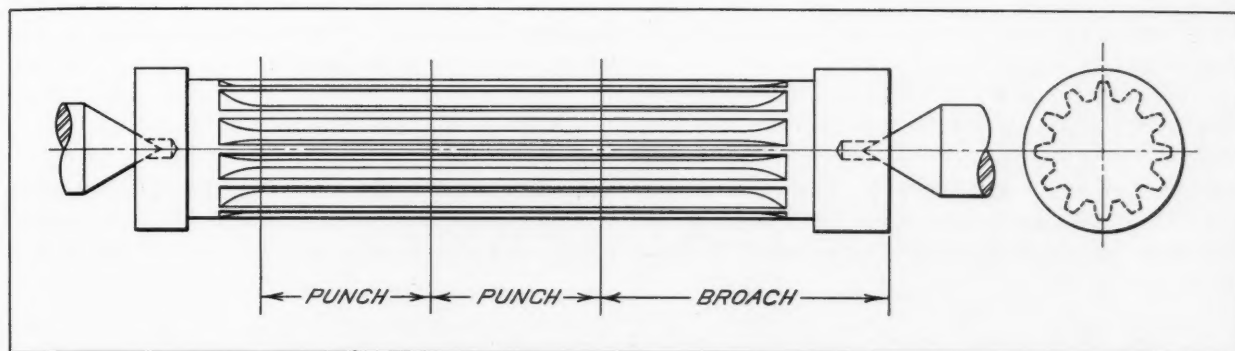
Both upper and lower punches for producing powdered-metal gears, as well as a broach for making the die, can be constructed from one piece of stock
